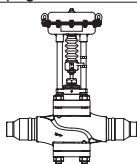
with butt weld ends: Spring closes on air failure
